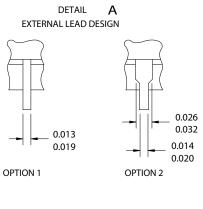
28-pin (300-Mil) Molded SOJ (51-85031)
